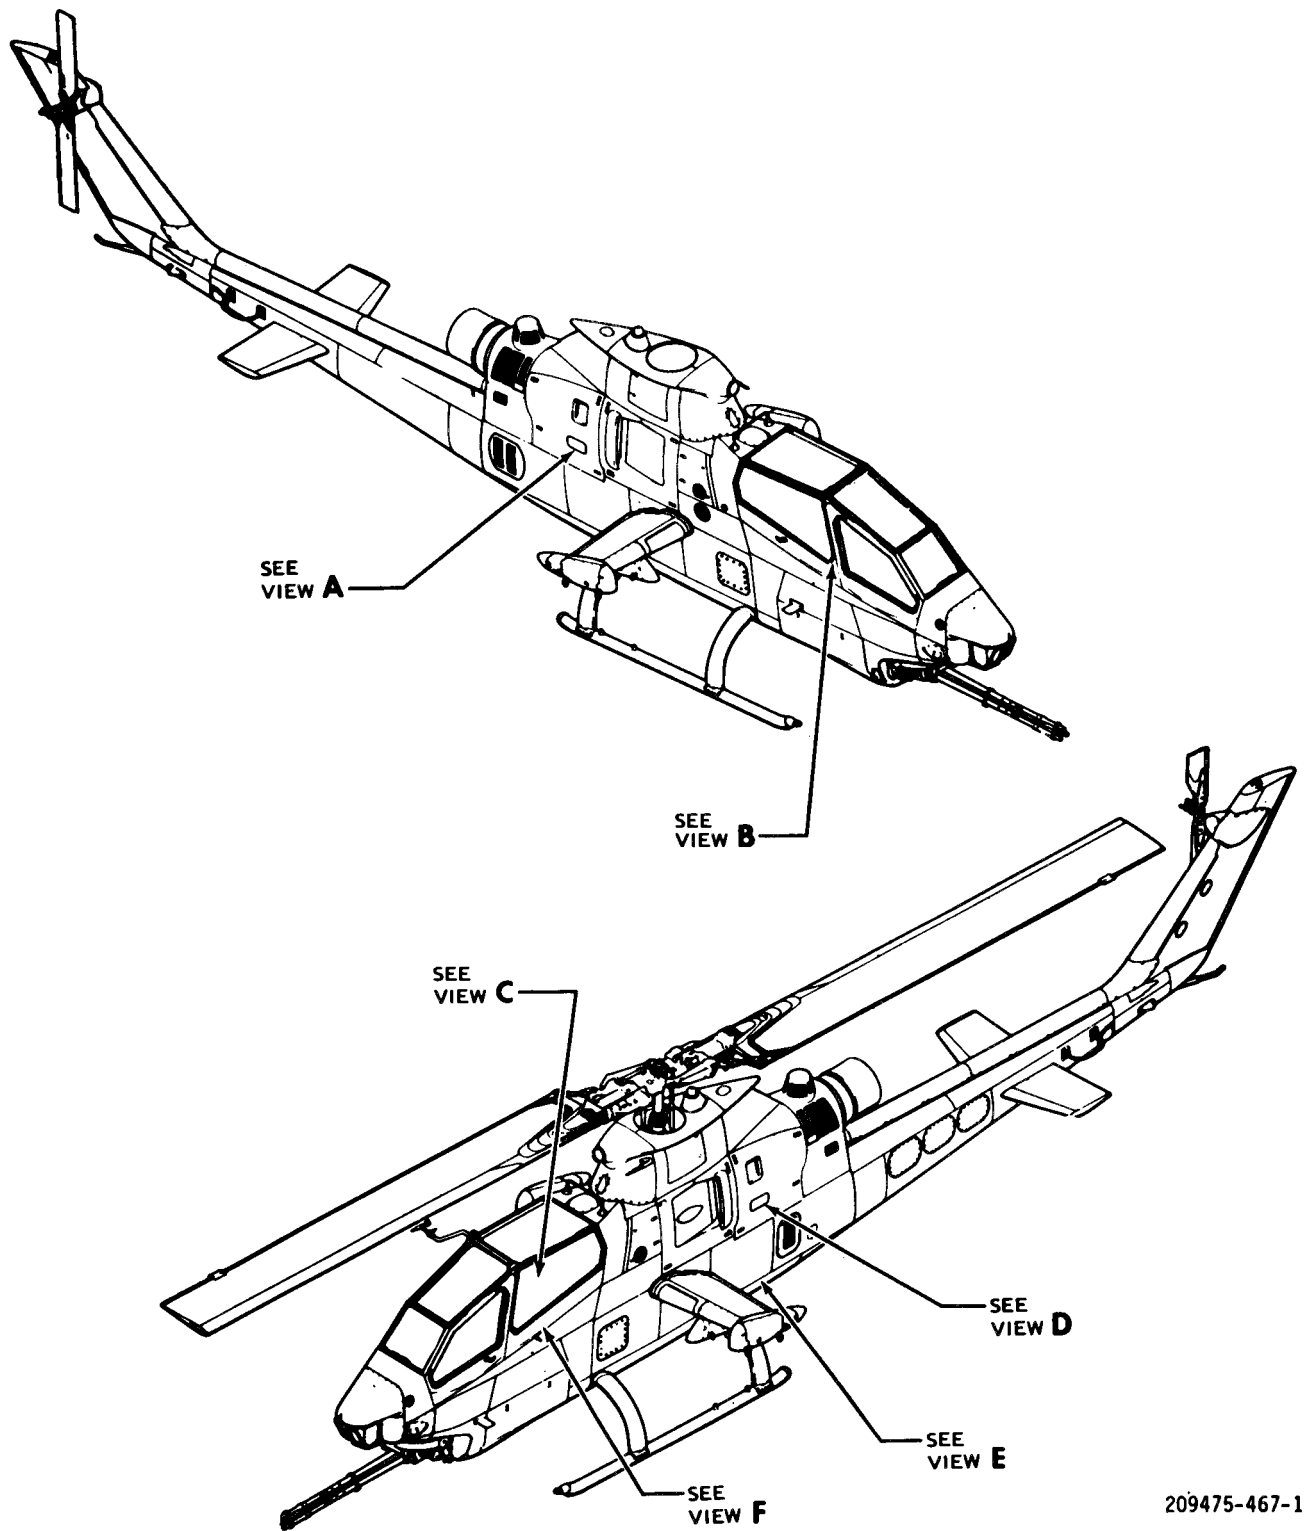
M Fuel Valve and Engine Oil Bypass Valve Systems (Sheet 2 of 8)
